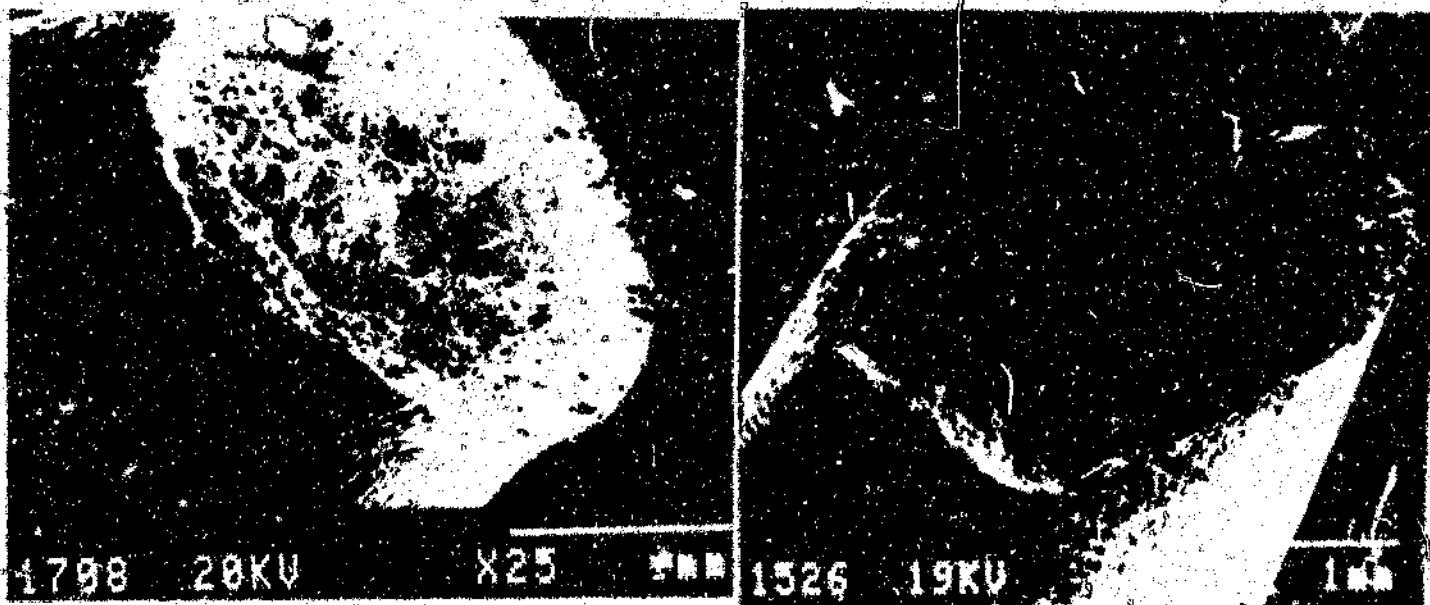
Fractured tensile specimens in (a) mild steel and (b) weld deposit in mild steel.
